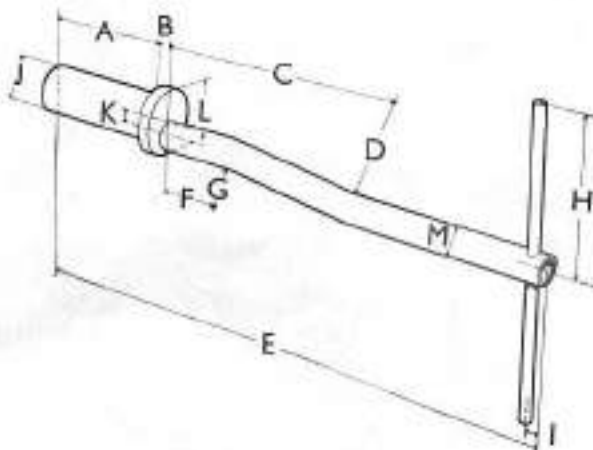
Tool shown can be fabricated locally and used to install differential lock sleeve. Refer to text for tool use procedure; dimensions are as follows:
